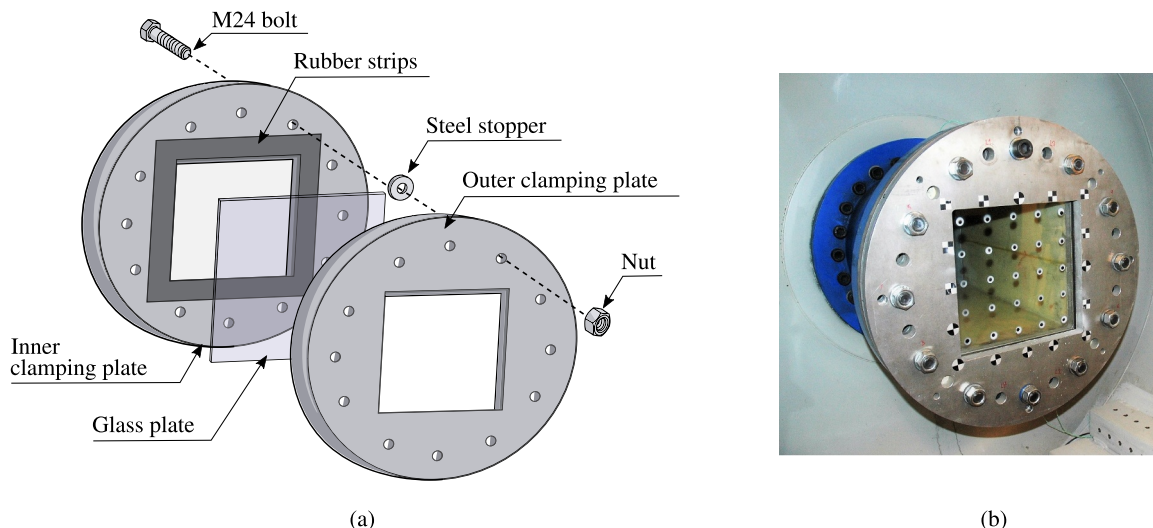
The custom-made fastening system for glass testing [13]: (a) disassembled, (b) assembled, showing the optical targets on the glass surface.
